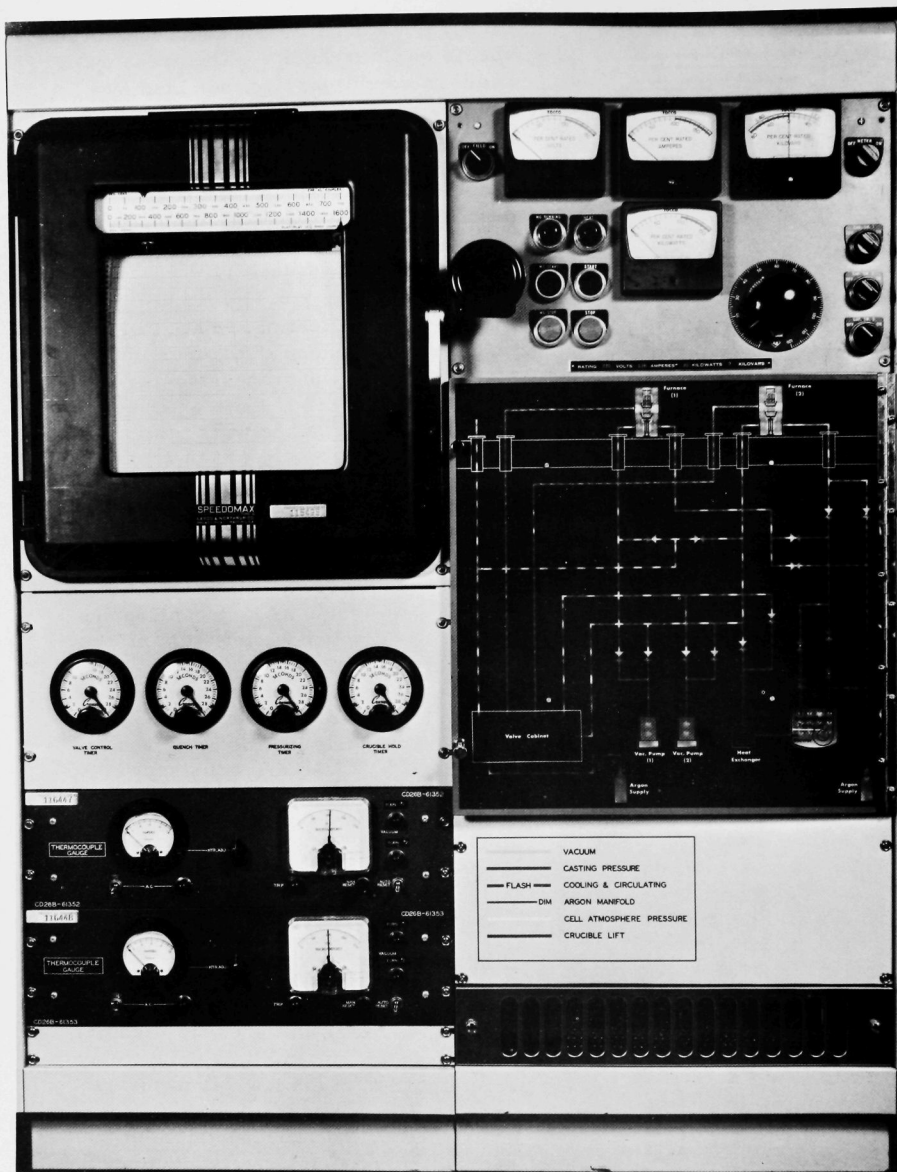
Controls for the Injection-casting Furnace and Vacuum Pressure System
